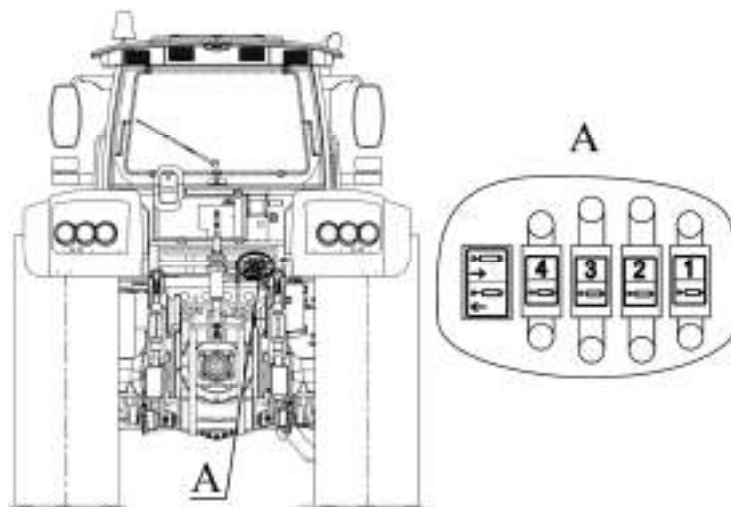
Diagram of connection of hydraulic outlets of the hydraulic distributor EHS to external consumers
